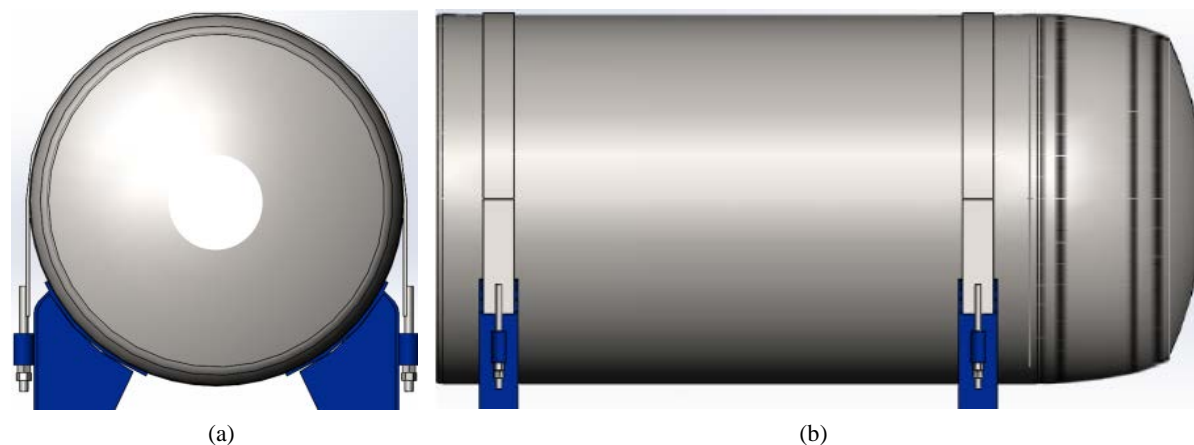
Liquid fuel tank structure. (a) Front view; (b) Side view
